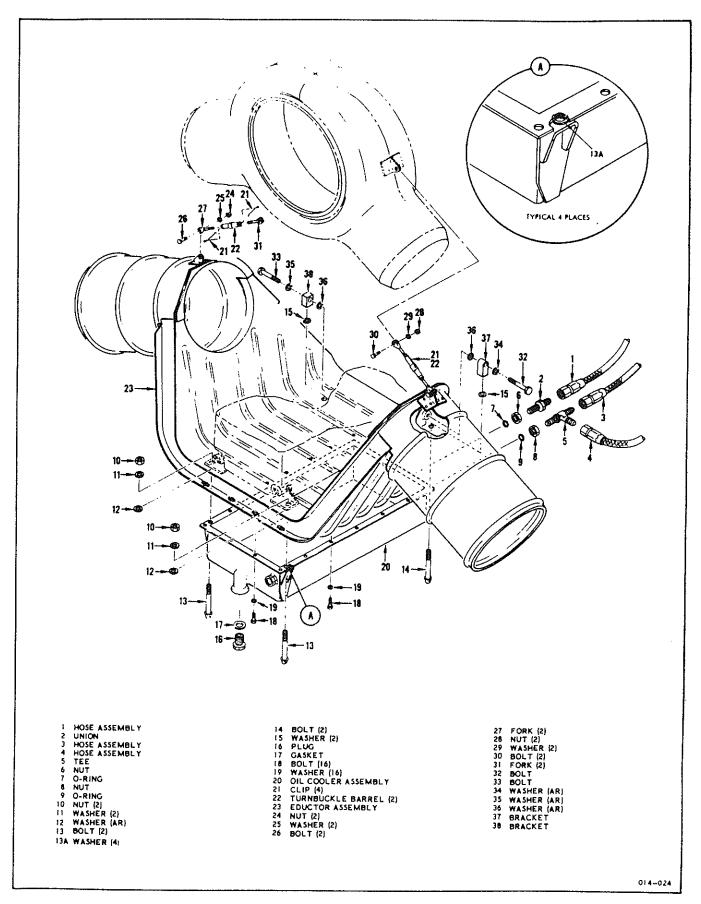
Oil Cooler and Eductor Installation, Exploded View
